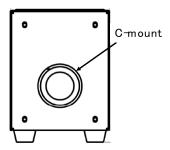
C-mount flange at the front panel of ARTCAM-2350SWIR
